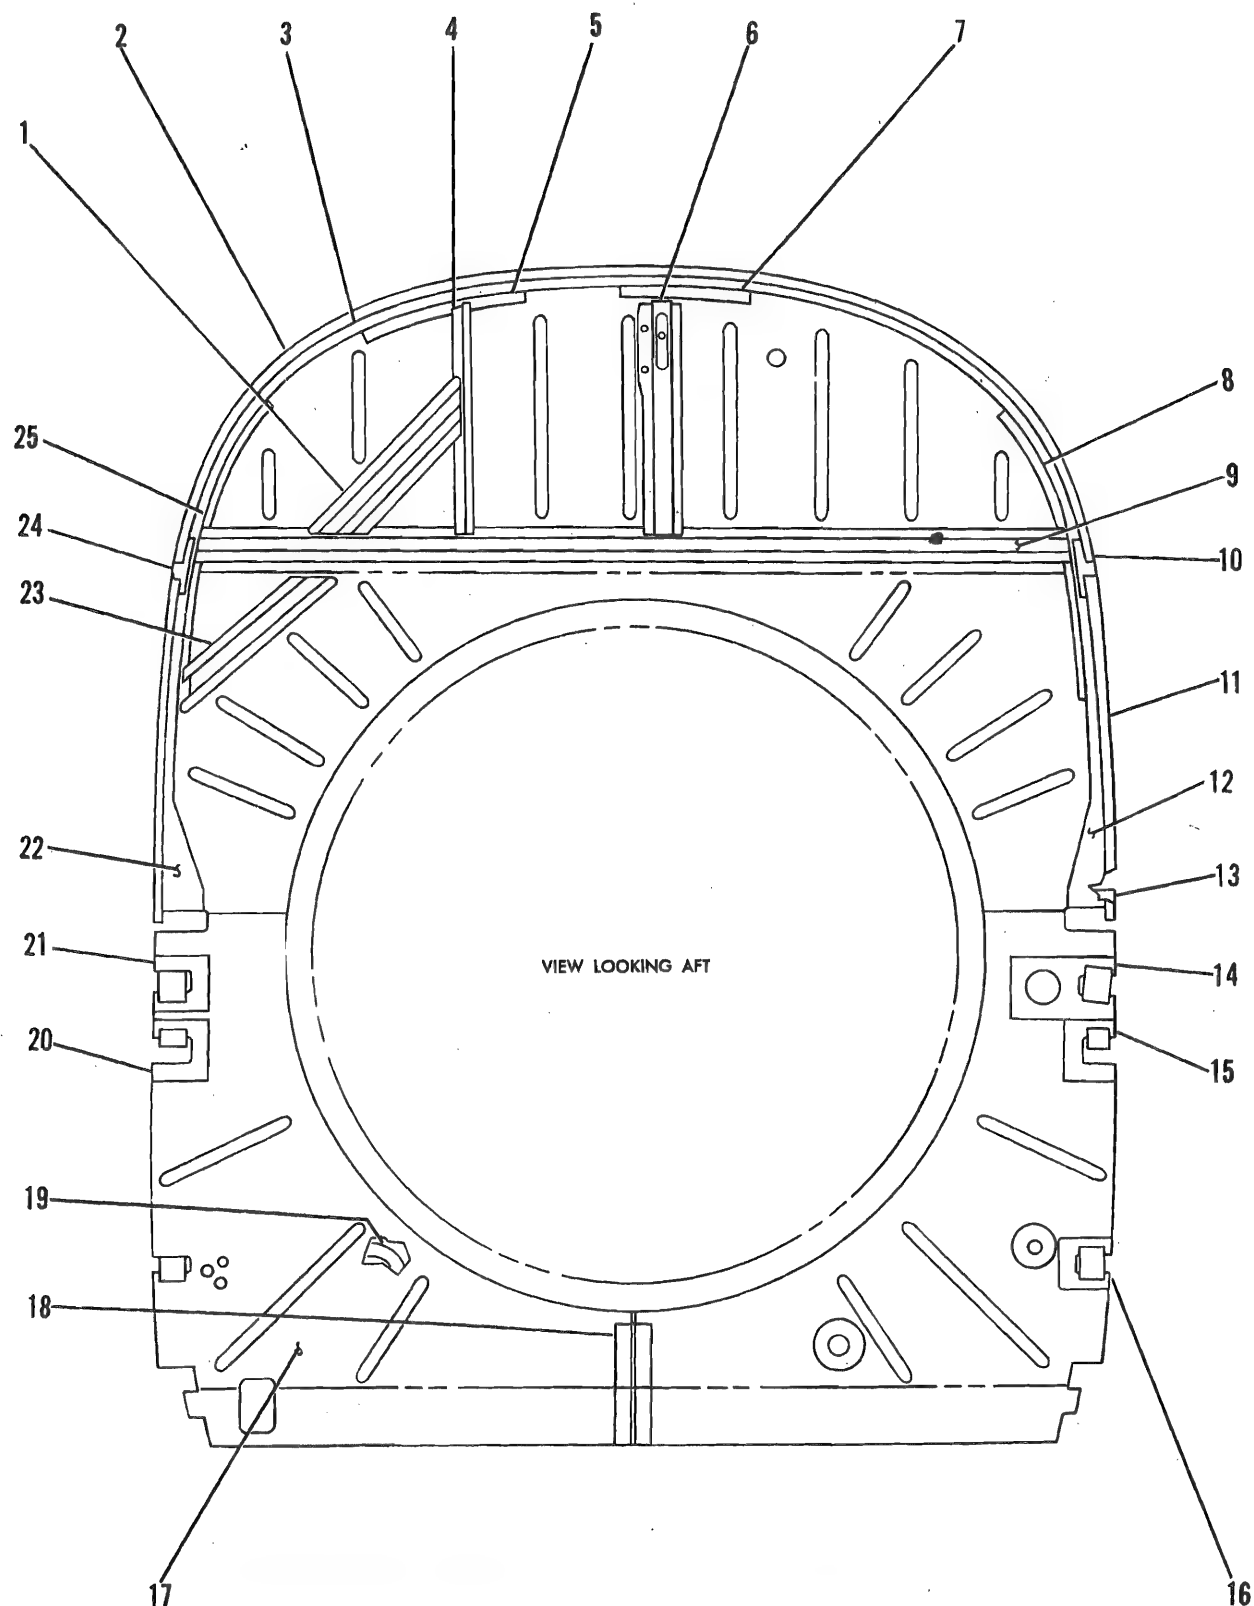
Canted Bulkhead – Sta 61.7 (Model CH-34A Serial No. Prior to 55-4462) (Sheet 1 of 2)
